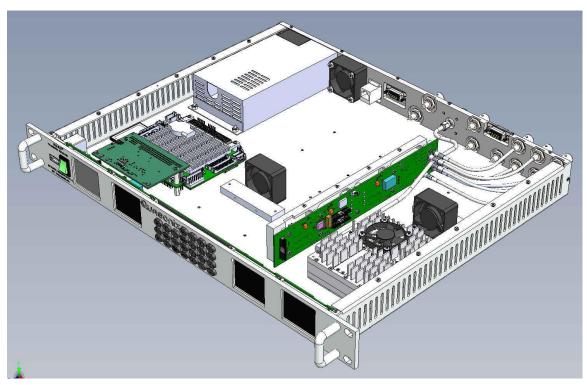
Interior 3-D Drawing of Single-Channel Receiver
